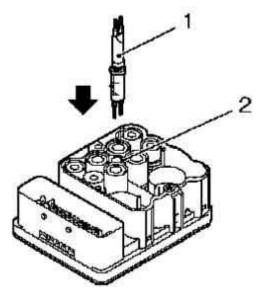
Installing the adapter: 1 - Adapter 2 - slide
